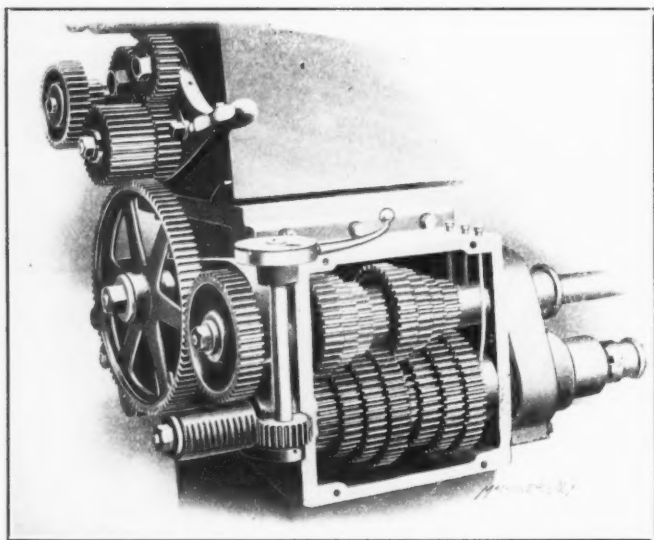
Quick Change Gear Casing, with Mechanism Exposed, showing Pinion and Rack for Shifting the Key.
